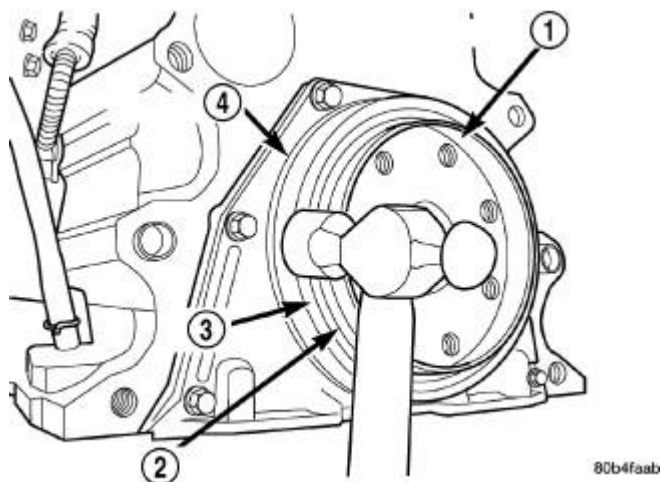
Seal Installation Using Alignment Tool and Hammer
